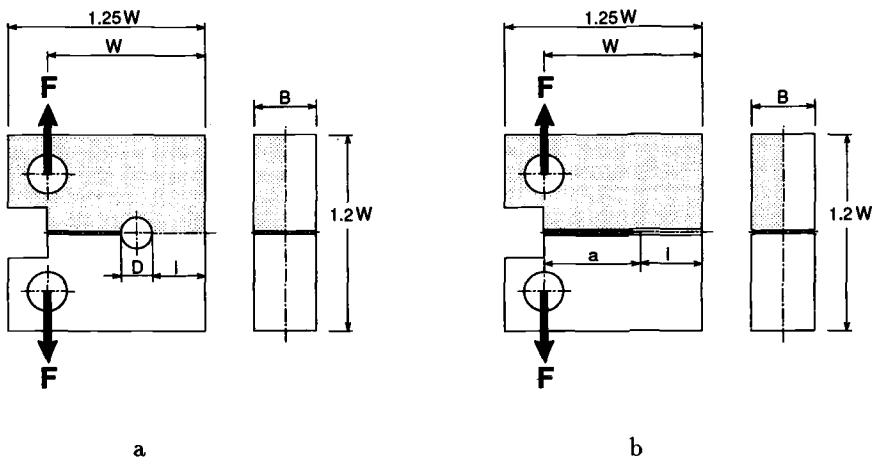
Geometry of compact tension specimen. In the experiments, $W = 50$ mm and $B = 20$ mm: (a) specimen with a drilled hole; (b) specimen with a sharp crack, 20% side grooved.
